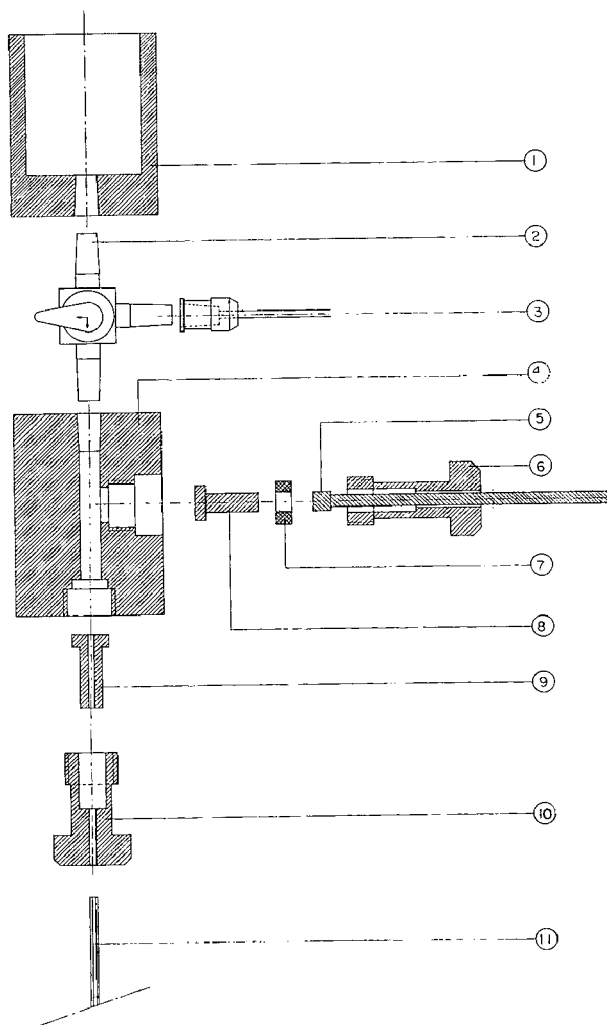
Counter electrode. 1 = reservoir; 2 = tefton-lined valve; 3 = connection towards the counterflow equipment; 4 = electrode compartment; 5 = high tension cable; 6 = bolt for fitting the electrode; 7 = rubber O-ring; 8 = Ag electrode; 9 = piece of perspex used for fitting the capillary tube; 10 = bolt for fitting piece 9 and the capillary tube; 11 = capillary tube.
